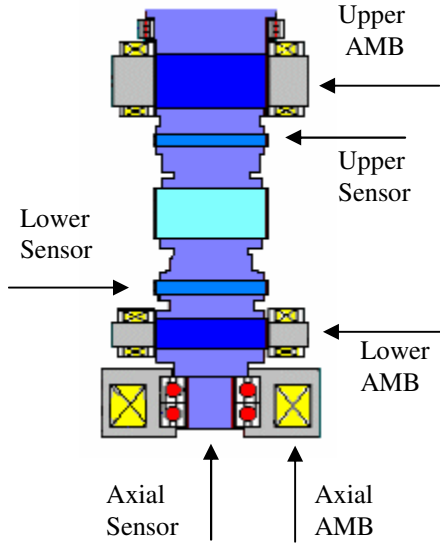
Schematic view of the TMP rotor, magnetic bearings and sensors.
